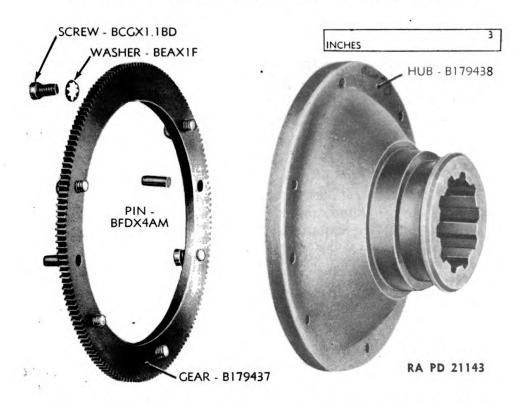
Dissassembly of Gear—Clutch Assembly C82056
